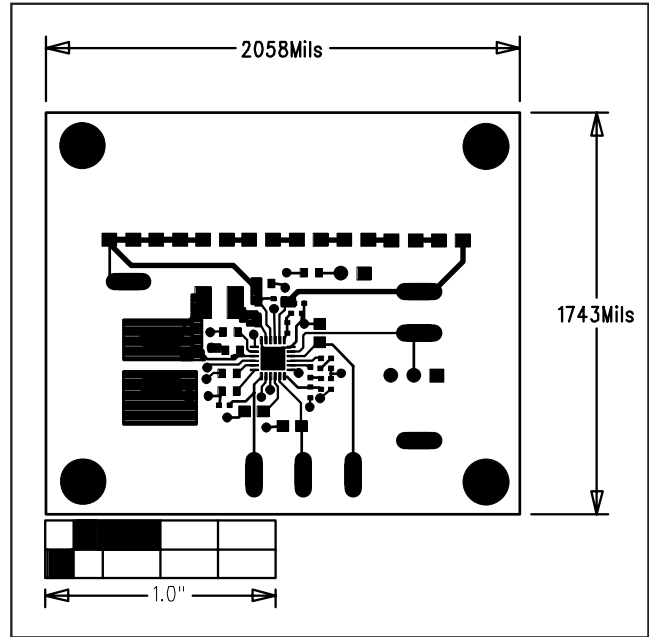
MAX1579 EV Kit PC Board Layout—Component Side
